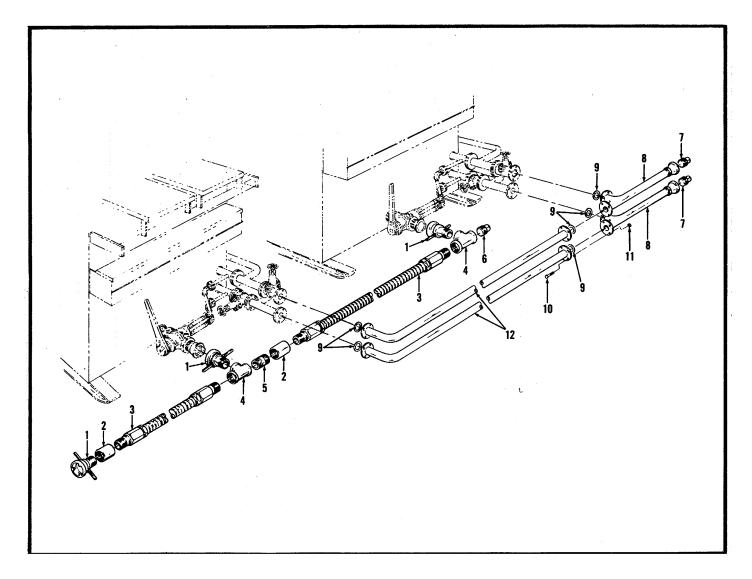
Hot oil and asphalt piping for multiple unit installation.
